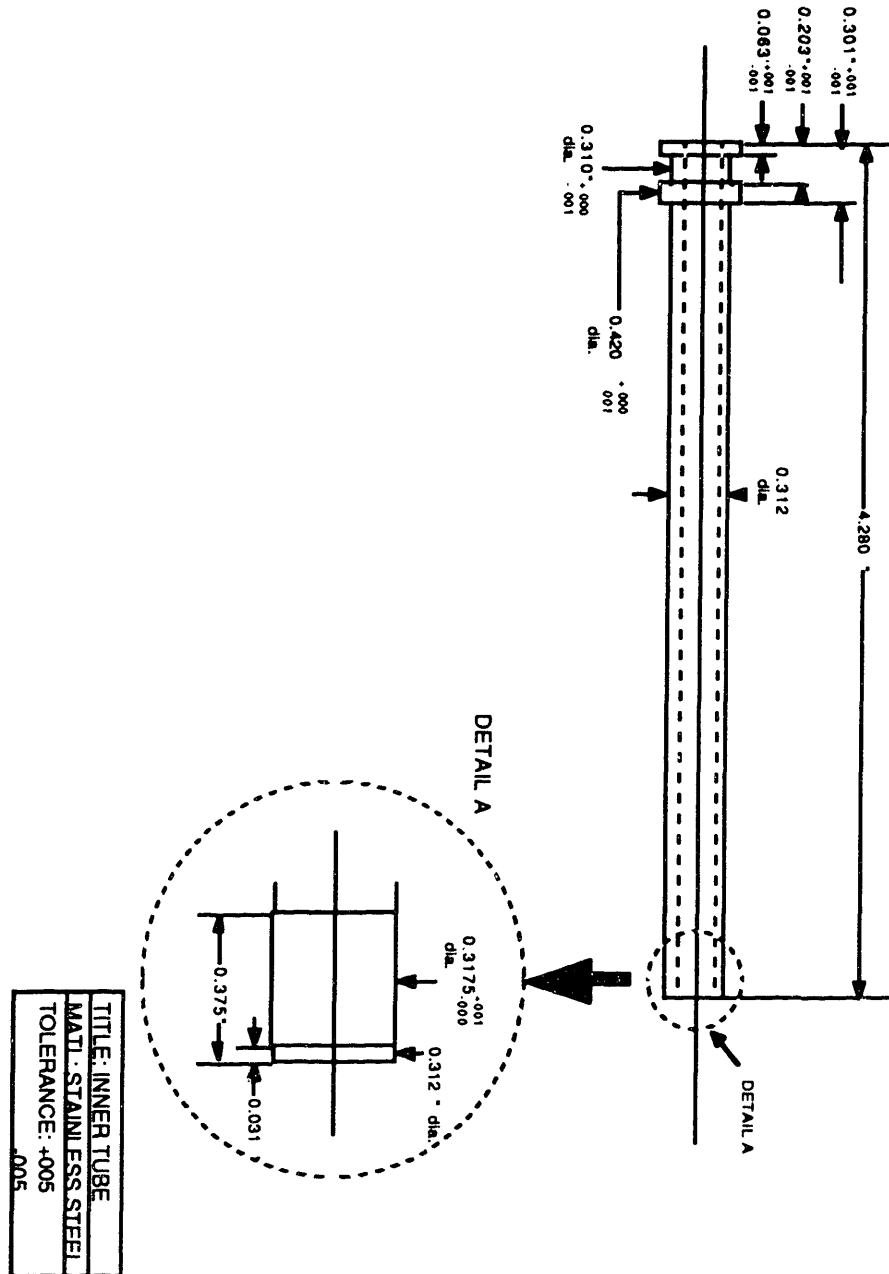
Engineering drawings of the parts for the coupling between the monopod and the planarizer. The coupling consists of three parts: the housing, the outer tube and the inner tube. The outer tube and the inner tube are a pressfit, forming a single piece which connects to the planarizer whereas the housing connects to the monopod. The high pressure supply hydraulic oil flows through the inner tube to the monopod, and the low pressure return hydraulic oil flows through the gap between the inner tube and the outer tube, back to the pump. The housing mounts on the outer tube with rotary bearing inbetween so that the monopod is free to rotate with respect to the tubes which are fixed to the vertical slide of the planarizer. The rotary optical encoder disk is mounted on the outer tube, and the rotational position of the housing with respect to the outer tube is read as the rotary position of the monopod.
